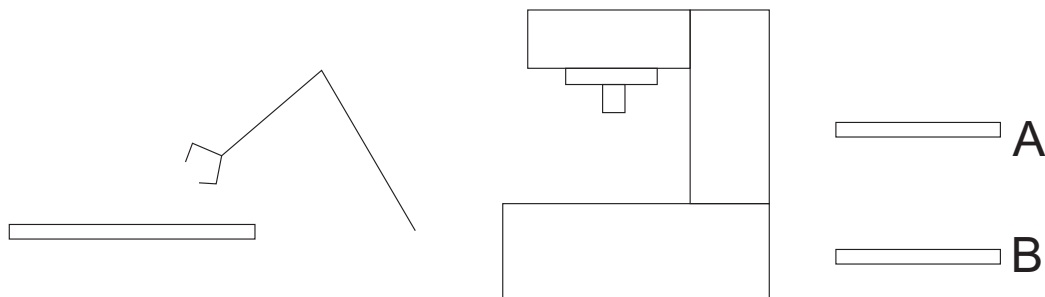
A robot and a machine. The robot takes parts from the input buffer and puts them on the machine. The machine loads the part brought by the robot, and after processing unloads it to the output buffer A or B.
